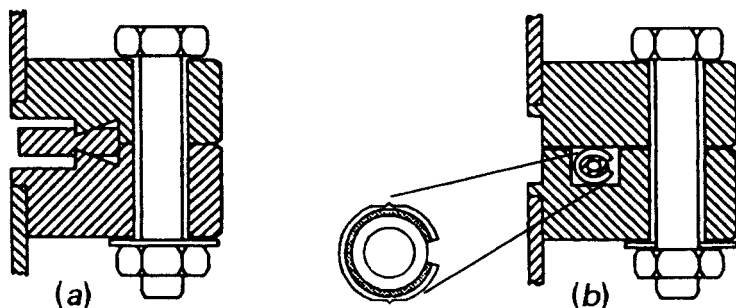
10 Metal gasket seals: (a) ConFlat type knife edge seal; (b) Helicoflex Delta seal.
